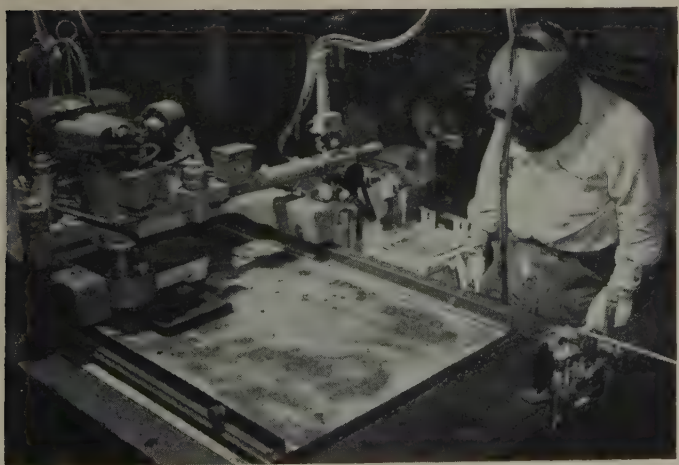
A templet guides the machine to the desired shape in welding a stainless steel container
